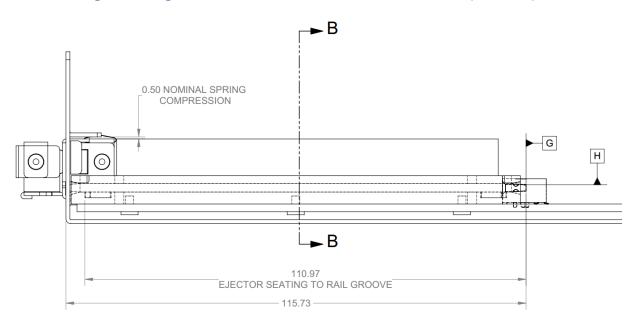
Large Form Factor Baseboard Chassis CTF Dimensions (Side View)
